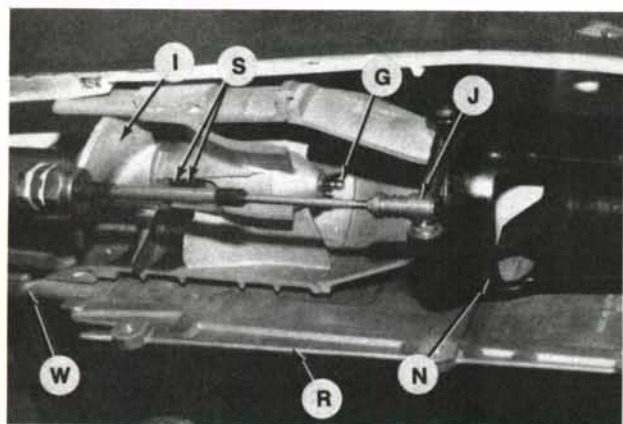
Cutaway view of jet pump assembly used on JS440 models and related components common to both JS440 and JS550 models.
